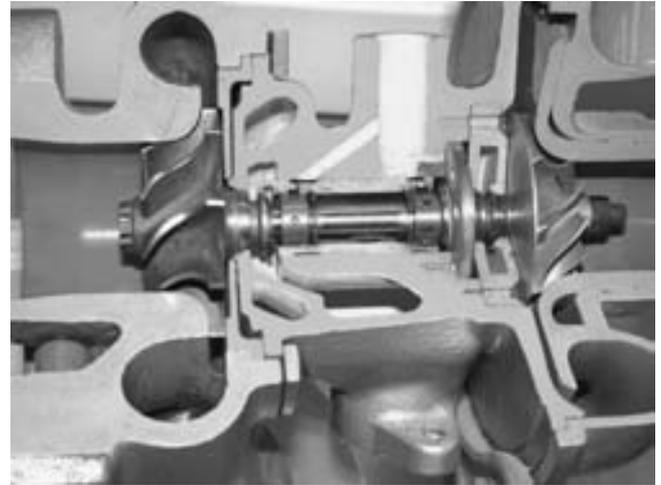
The exhaust drives the turbine wheel on the left, which is connected to the impeller wheel on the right through a shaft. The bushings that support the shaft are lubricated with engine oil under pressure.
